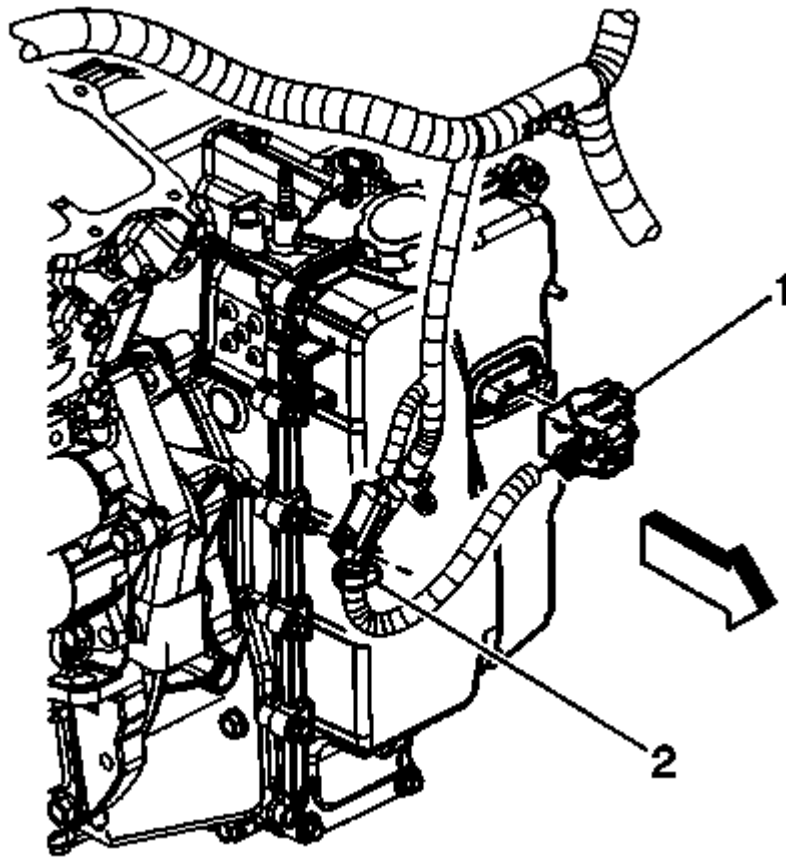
Identifying Wire Harness Retainer & TCM Electrical Connector
